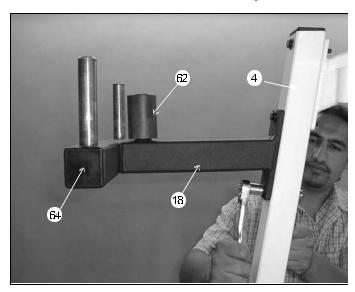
Next, attach the Pec Dec Housing (#18) to the Rear Upright (#4). secure this assembly using one Hex Head Cap Screw 3/8-16 X 3 1/2 (#8), two Flat Washers SAE 3/8 (#90) and one Nylon Insert Jam Lock Nut 3/8-16 (#86). Note: This bolt should be placed in the top hole of the Pec Dec Housing (#18). Next, install one Hex Head Cap Screw 3/8-16 X 3 (#94), two Flat Washers SAE 3/8 (#90) and one Nylon Insert Jam Lock Nut 3/8-16 (#86) through the lower hole of the Pec Dec Housing (#18). Finally, install the Rubber Stopper (#62) and two Plastic Insert Caps 2 Sq. (#64), as shown above.
